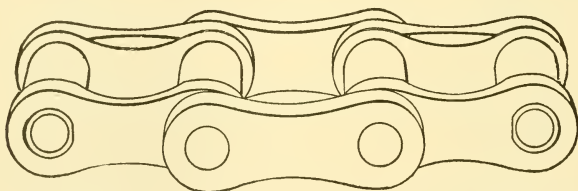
Section of a driving chain, showing arrangement of the rollers and side links.
